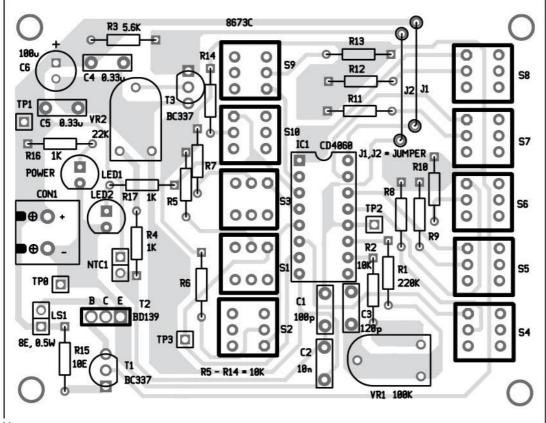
An actual-size, single-side PCB for multi-tone configurable alarm
